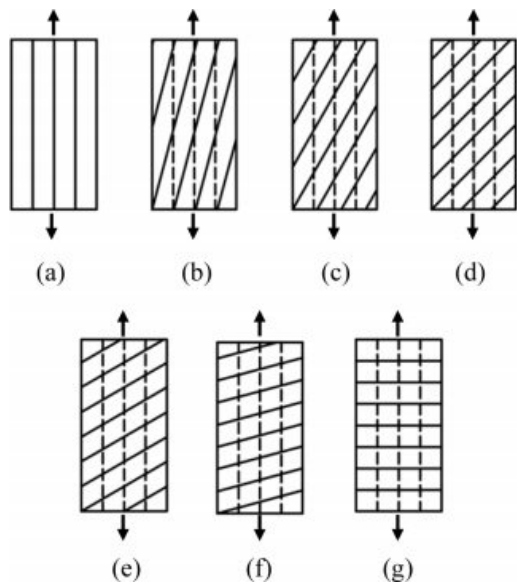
Schematic drawings of layered specimens for asymmetric tool paths: (a)0/0; (b) 15/0; (c) 30/0; (d) 45/0; (e) 60/0; (f) 75/0; (g) 90/0.
